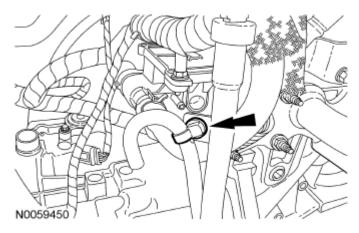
Locating PTU Vent Hose Retainer Courtesy of FORD MOTOR CO.
